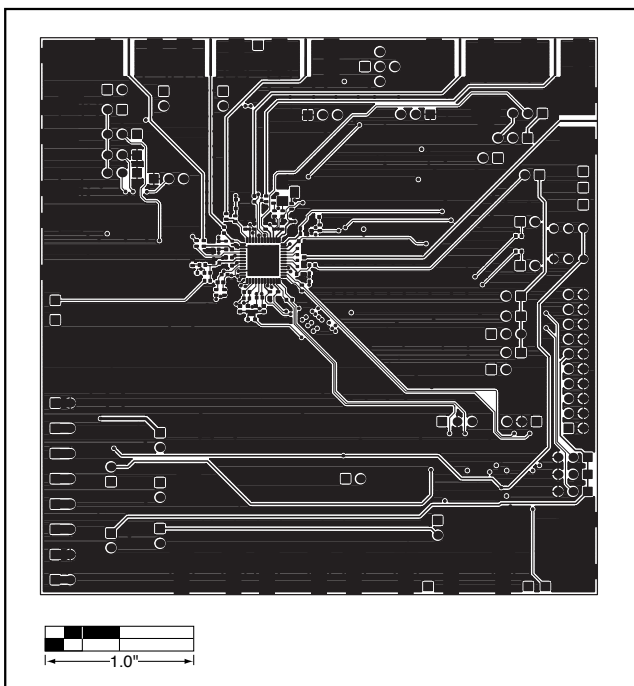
MAX256\_/MAX257\_ EV Kit PC Board Layout—Component Side
